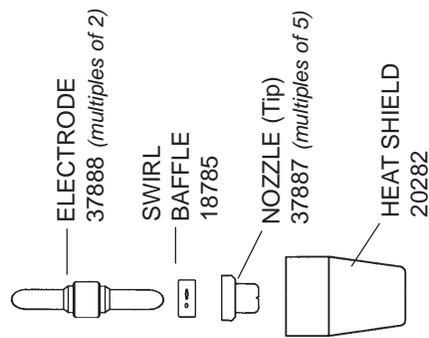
PT-34 Torch Assembly, P/N 37886 (15 ft. lines)
